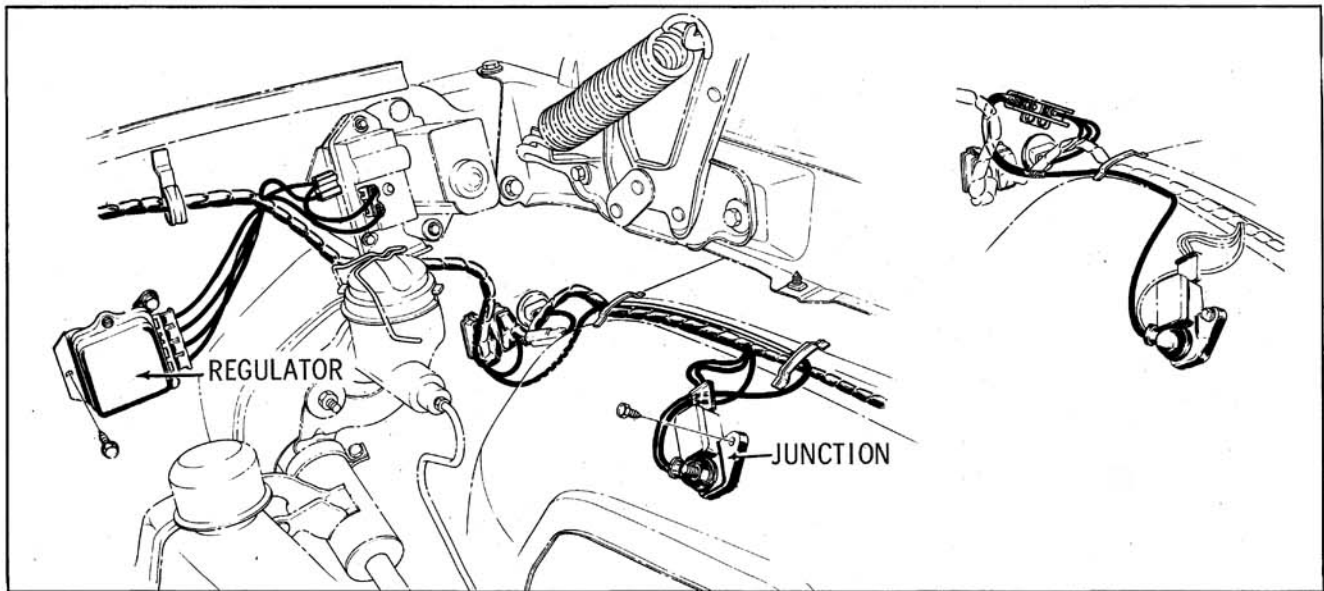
Chassis Wiring Harness (V-6 Engine)
